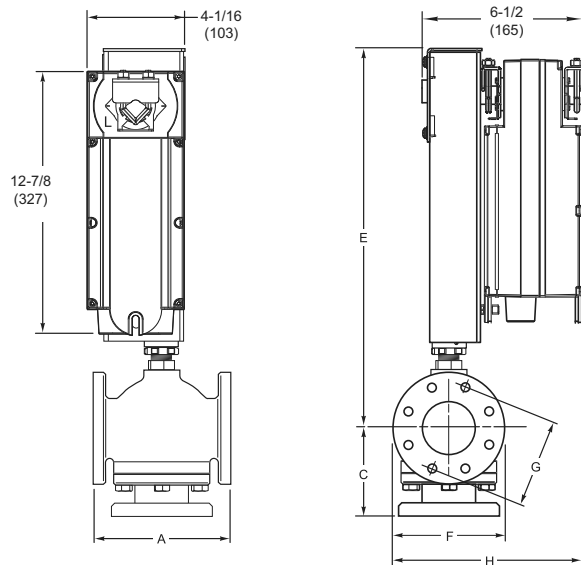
Mx40-717x with 5 to 6" Flanged 3-Way Globe Valves.
